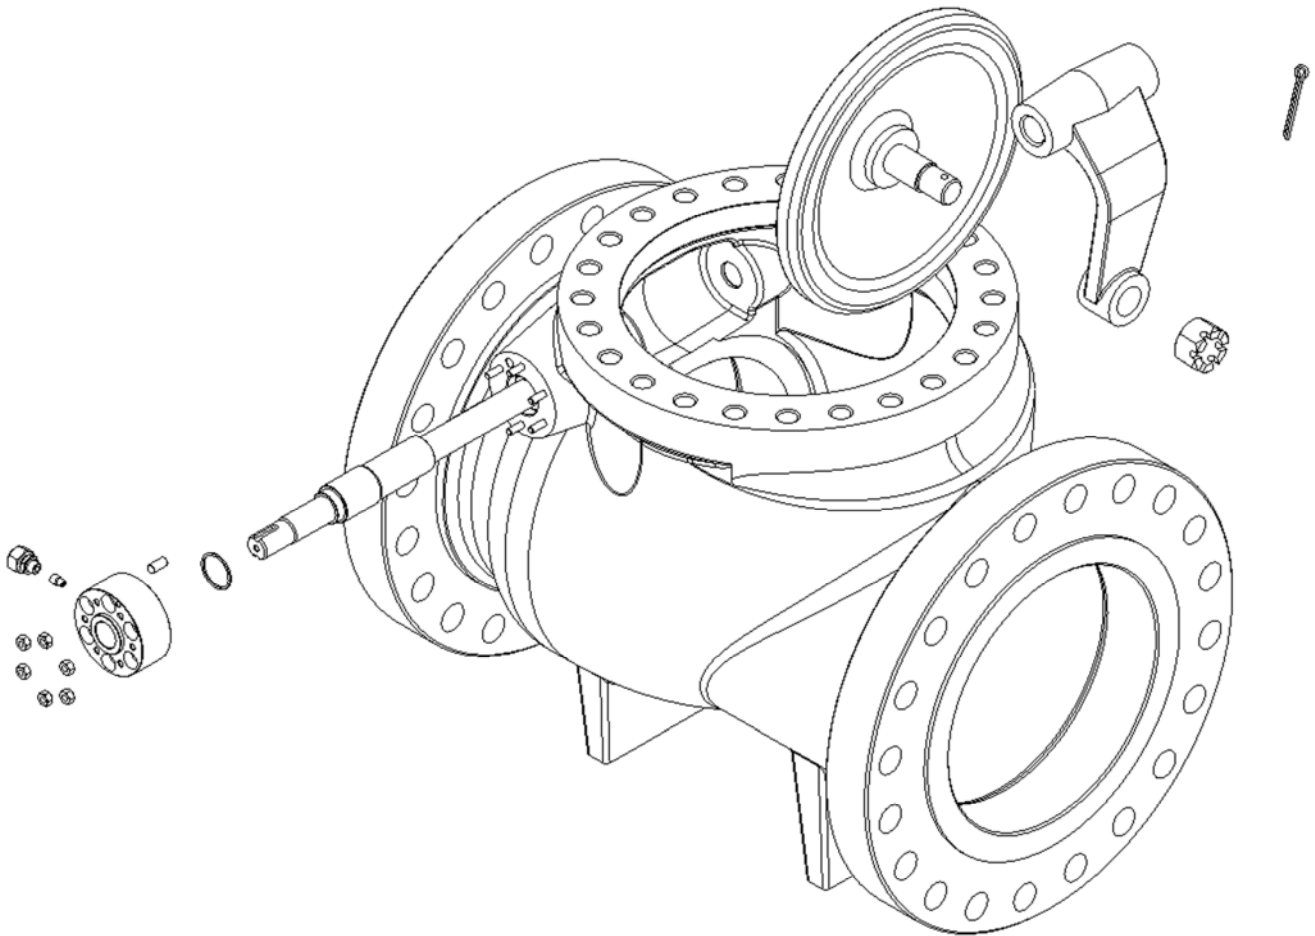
Insertion of arm-clapper assembly and shaft assembly shown
